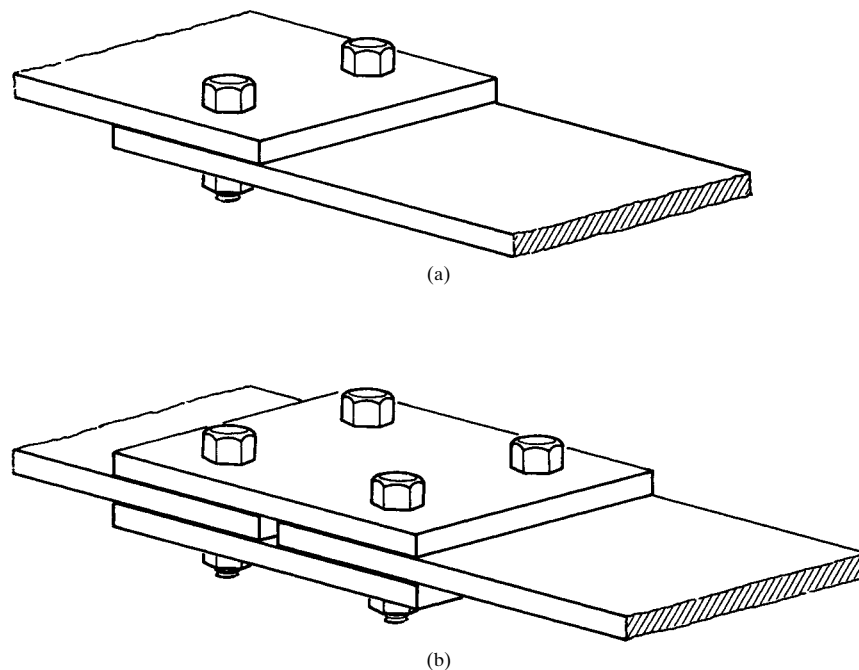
Joints loaded in shear. (a) Lap joint; (b) butt joint.
